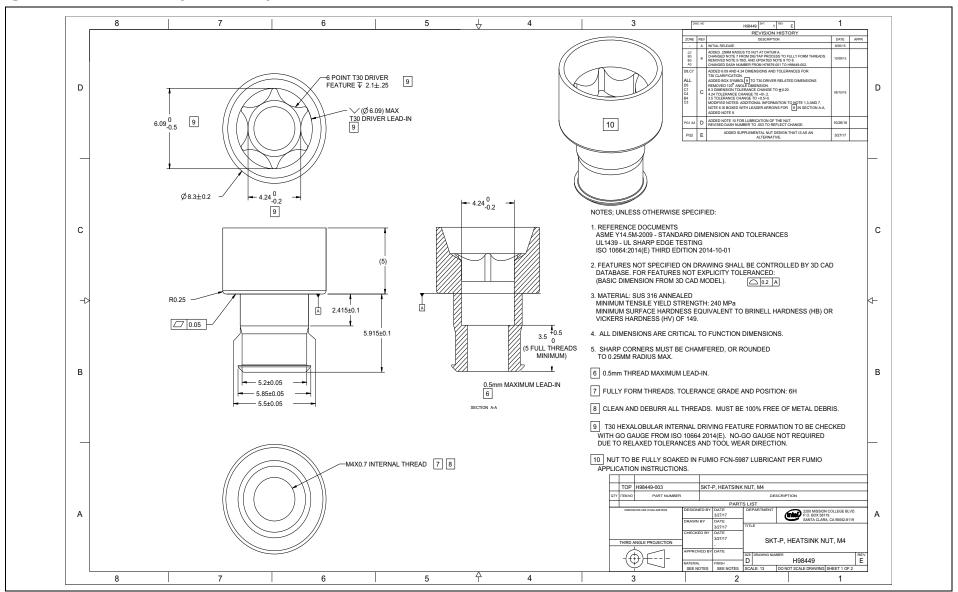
Heatsink Nut (Sheet 2 of 2)
